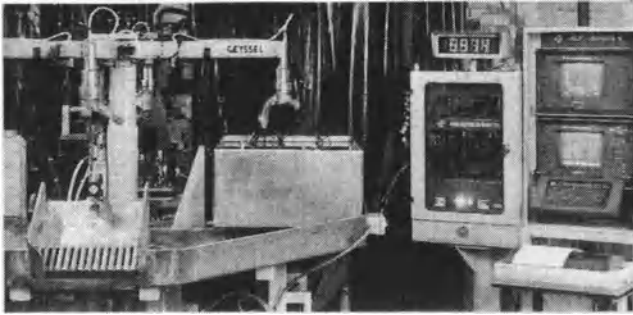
Test installation for cast automobile parts (design Krautkrämer)
